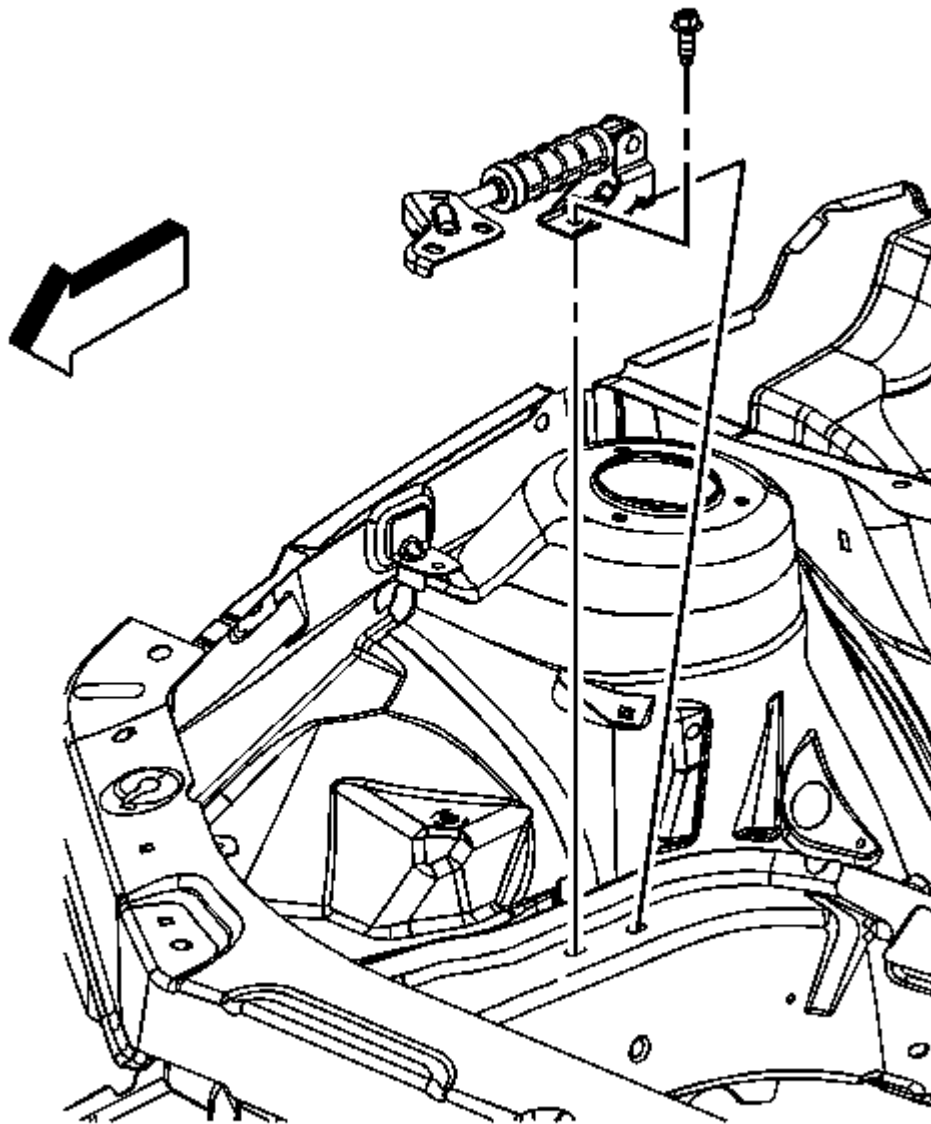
Engine Mount Snubber To Engine Compartment Side Rail & Bolt
